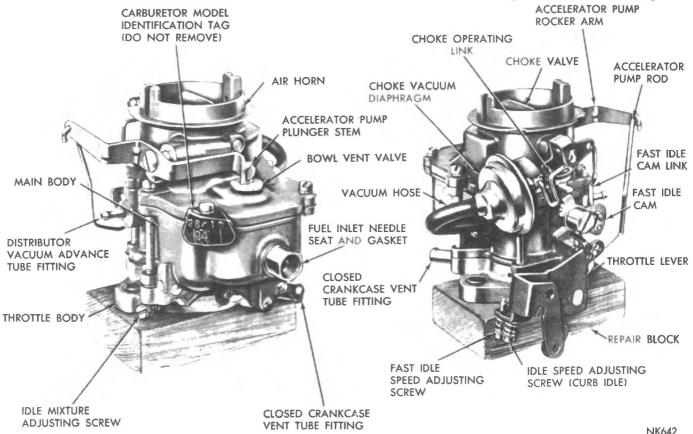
Carburettor Assembly BBS-3837S and BBS-3838S
